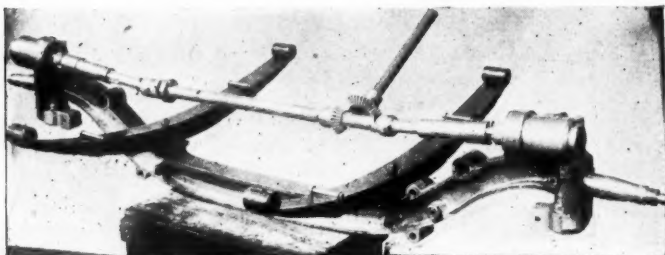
Waseige duplicate steering gear—screw, nut and lever
